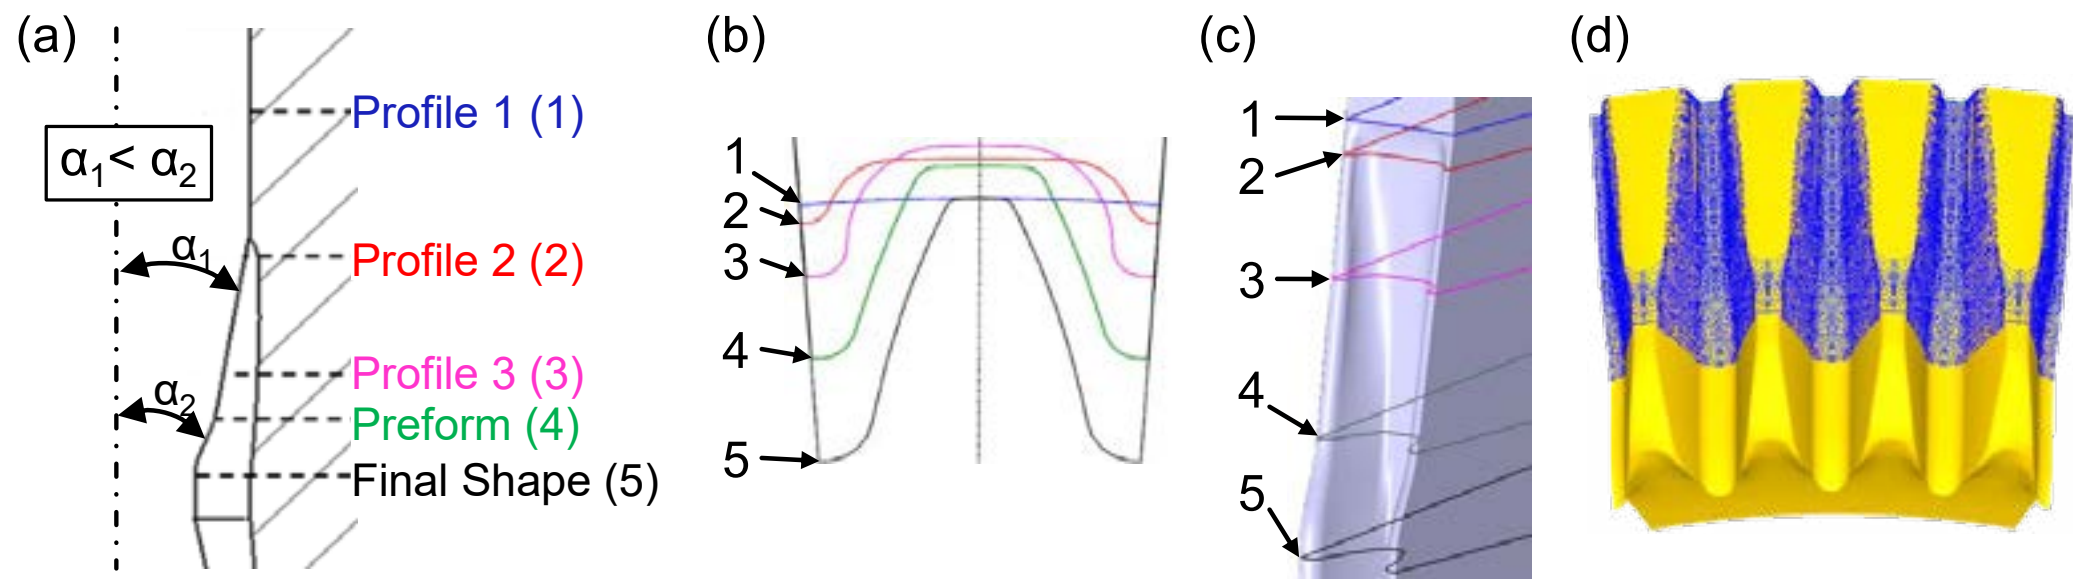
GMF-Samanta process for cold forging of spline gears [10]
